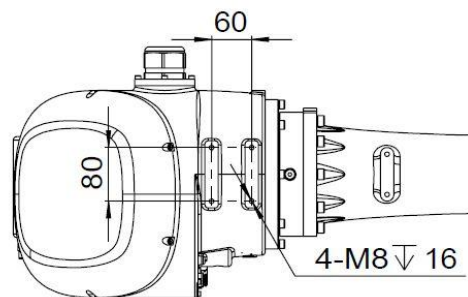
Schematic diagram of the load interface dimensions for the manipulator elbow
